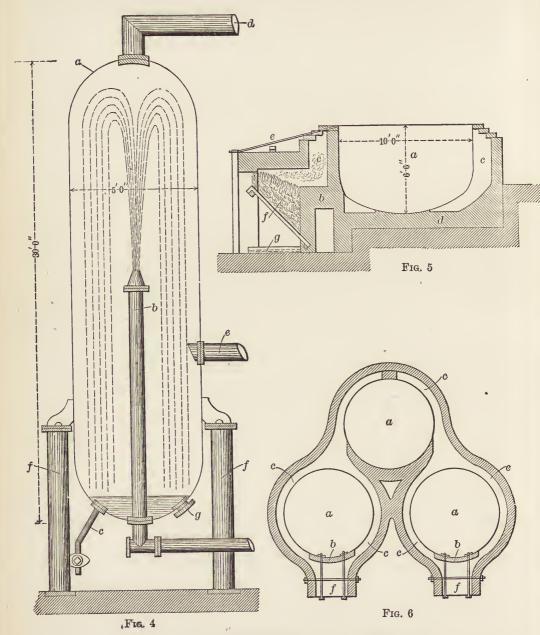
Absorbing Towers. Sectional Elevation. Figs. 5 and 6.—Boiling-down Pans. Sectional Elevation and Cross SECTION.
